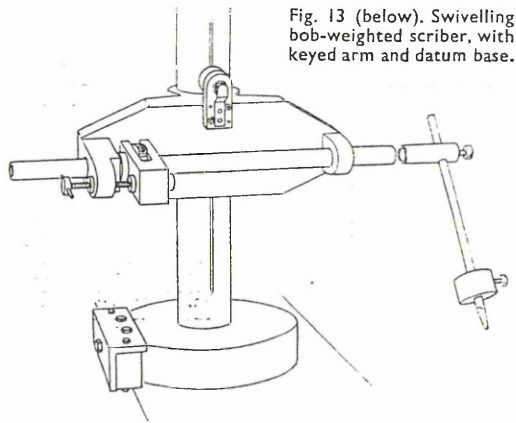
(below). Swivelling bob-weighted scriber, with keyed arm and datum base.
